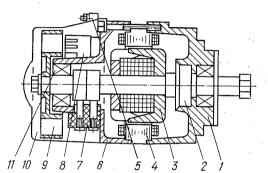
Generator Γ424: I—cover; 2—seal; 3—rotor; 4—stator winding; 5—termi-nal block; 6—rear cover; 7—brush holder; 8—rectifier unit; 9—fan; 10—protective casing; 11—bearing
